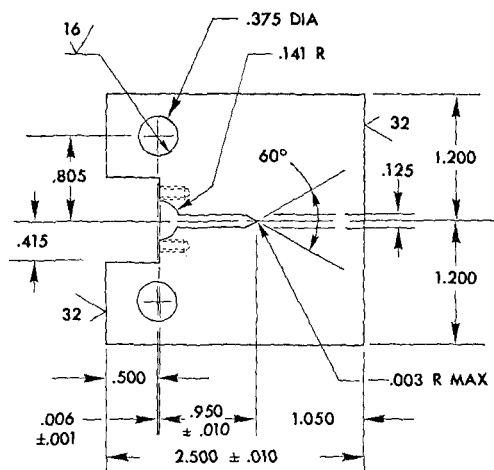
Drawing of 1T compact specimen used for side groove investigation (1 in. = 25.4 mm).
